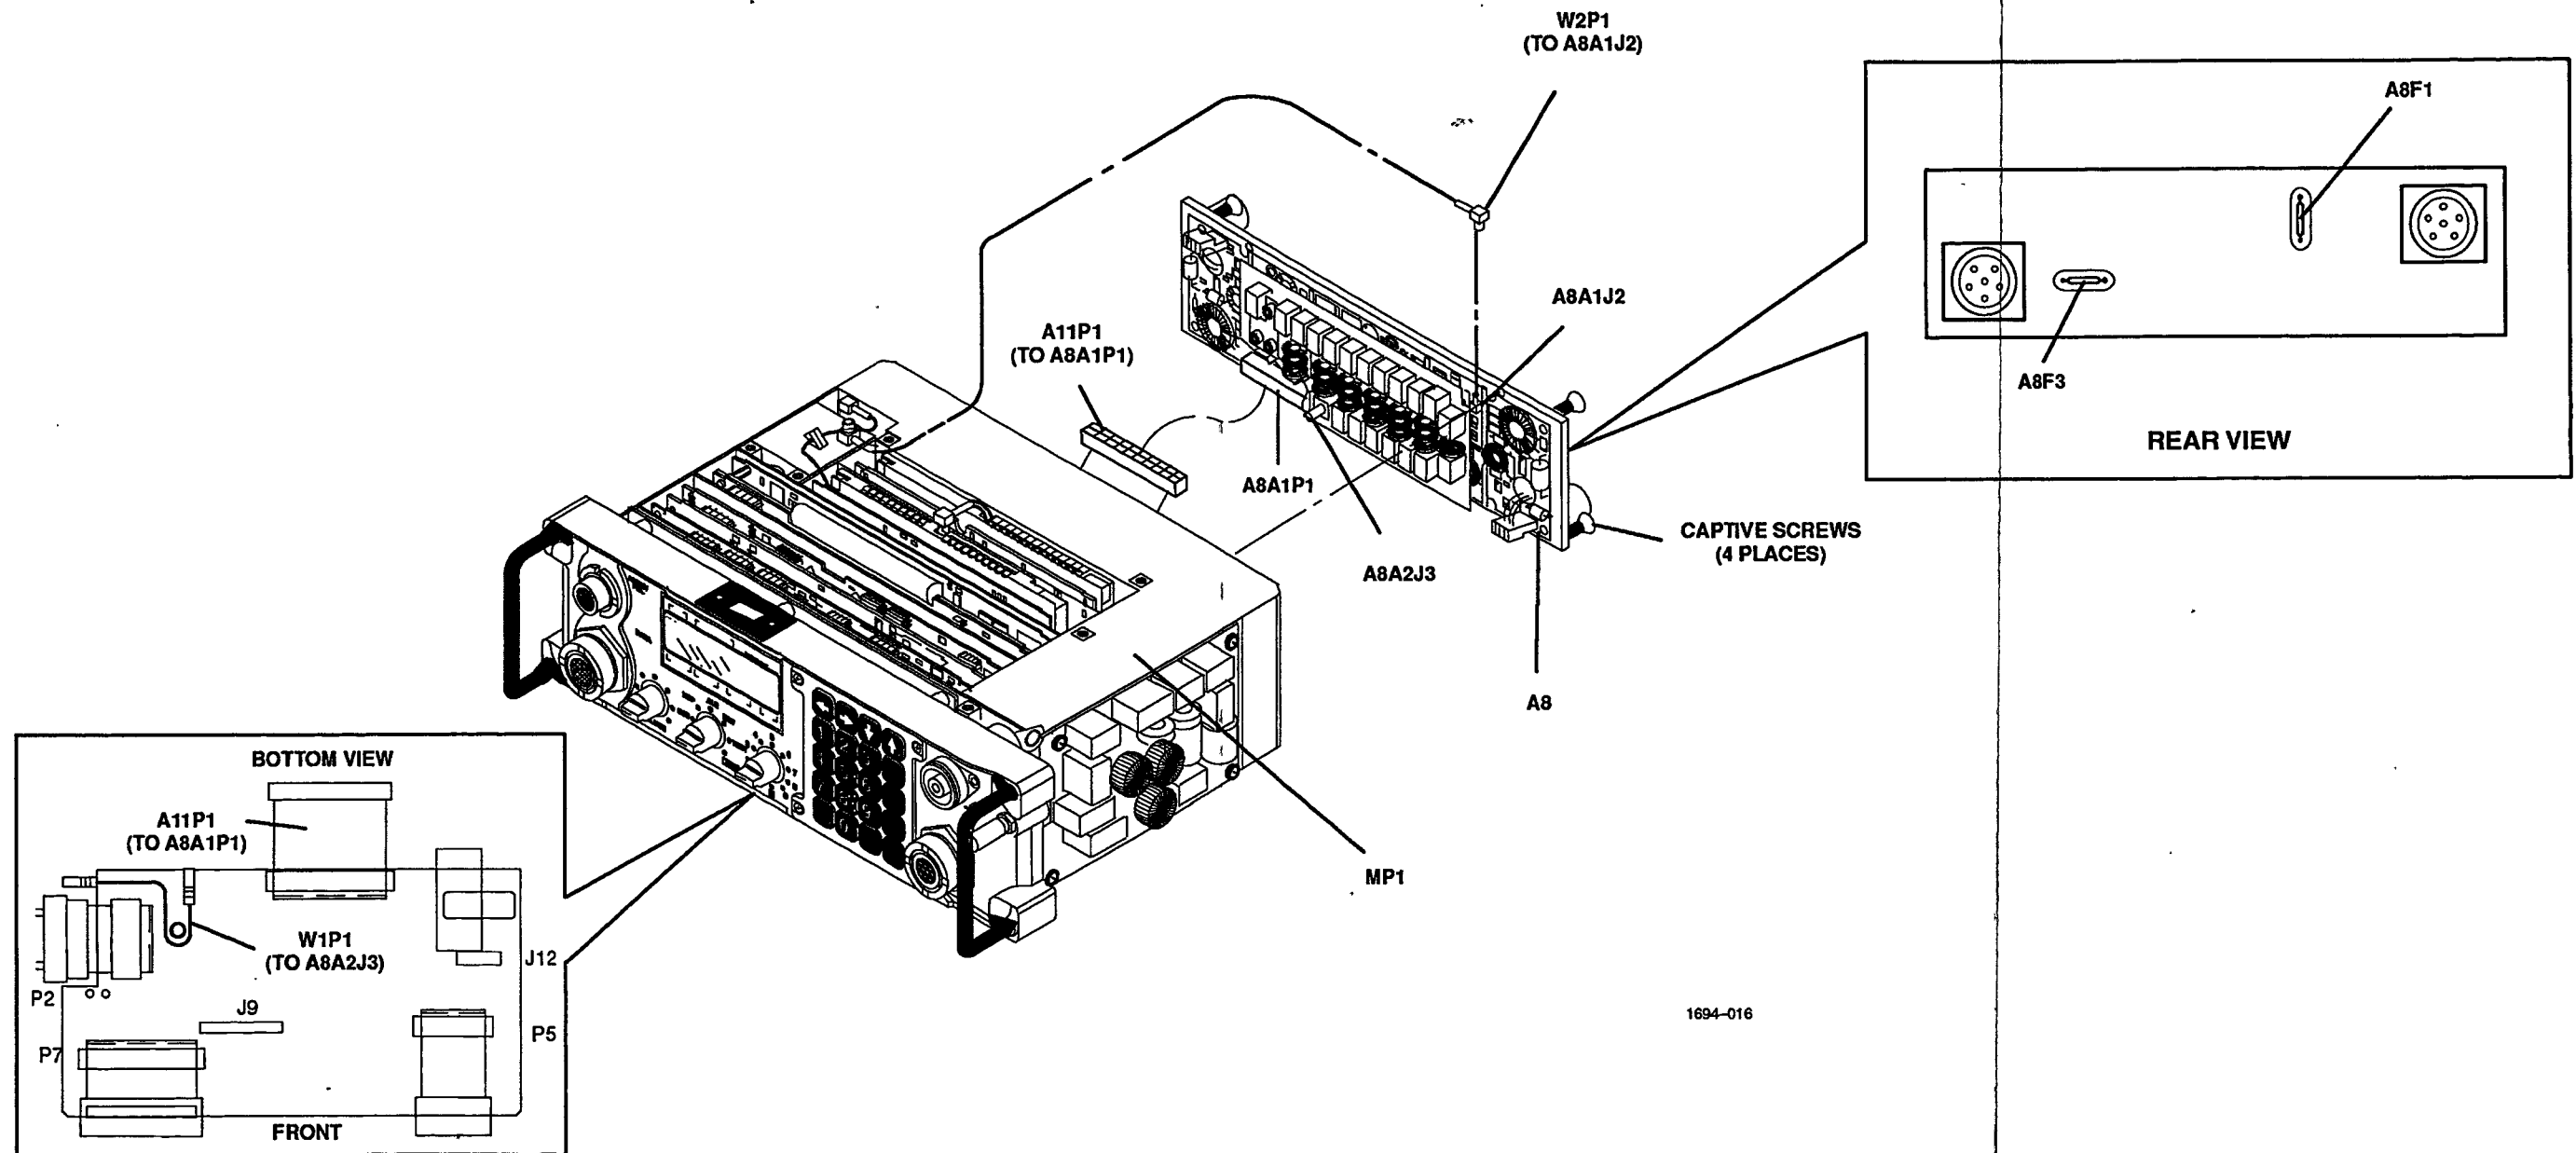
A8 PA/Battery Charger Assembly Connector and Hardware Locations
